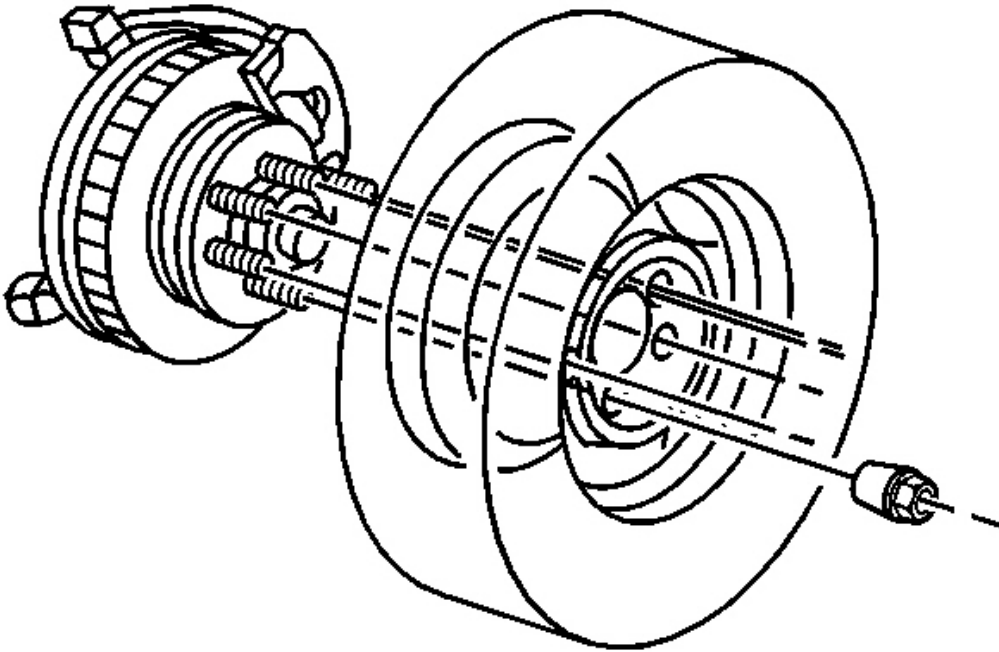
View Of Tire/Wheel Assembly, Hub Assembly & Wheel Nuts
